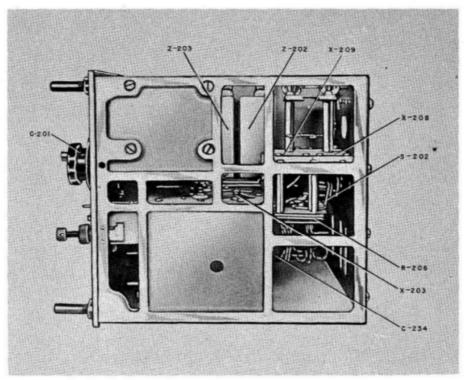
Receiver Unit — Right End Open View (older model shown; see note for Fig. 1)
